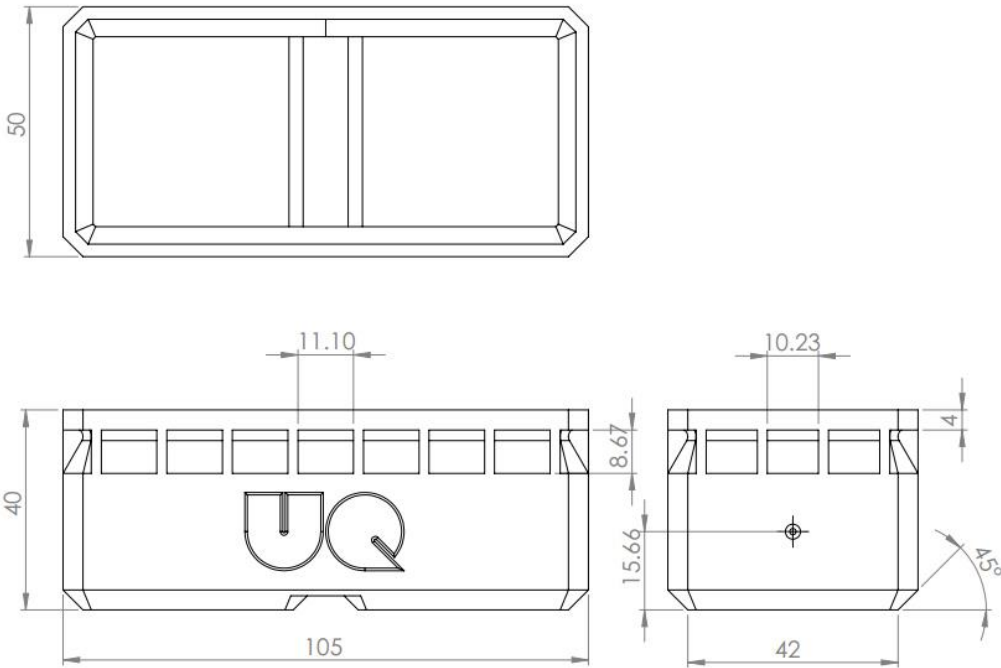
Container dimensions, as designed – manufactured to ±0.5 mm tolerance
